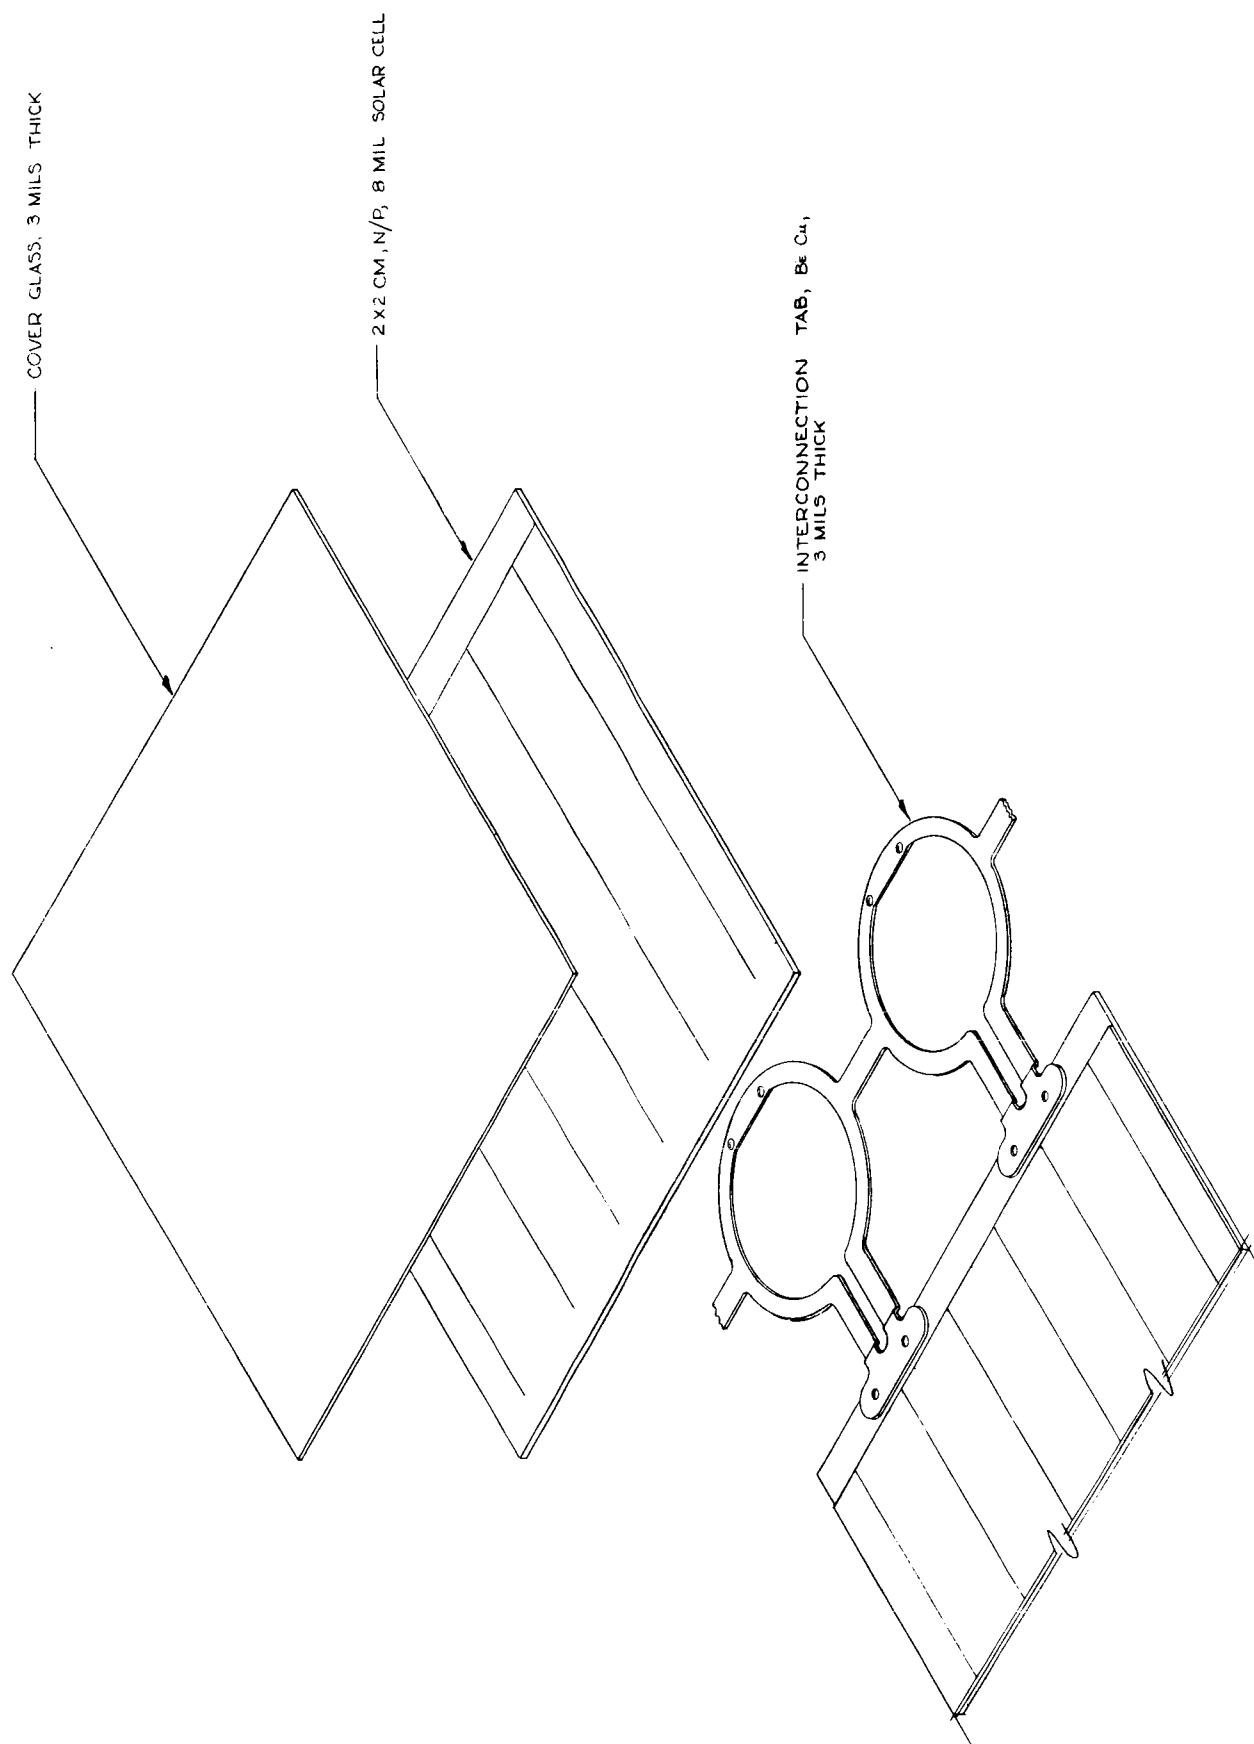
Exploded Isometric of Solar Cell/Cover Glass/Tab
